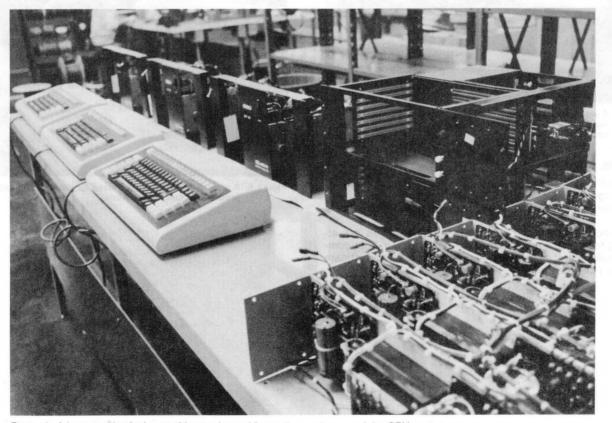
A large mechanical assembly area is used for custom systems work for OEM customers.
